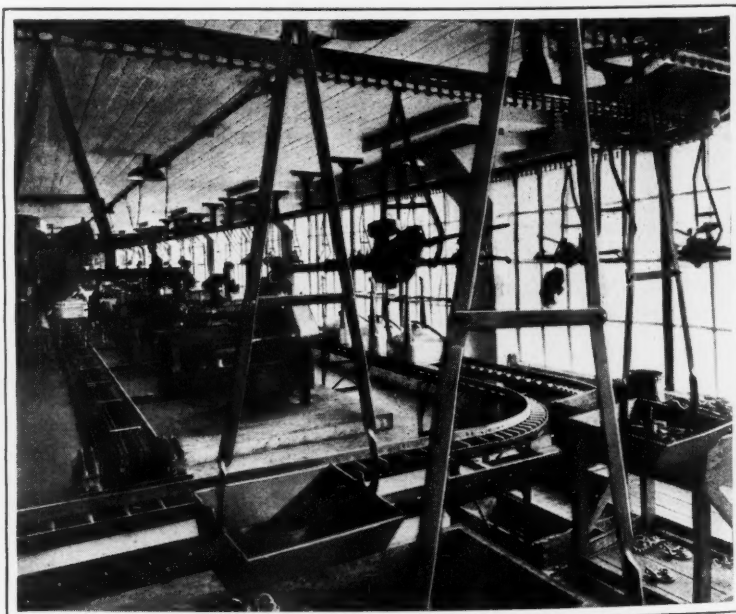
Three Types of Conveyors; Two of these Carry Parts Ready for Assembly, and the Third is Part of the Assembly Line
